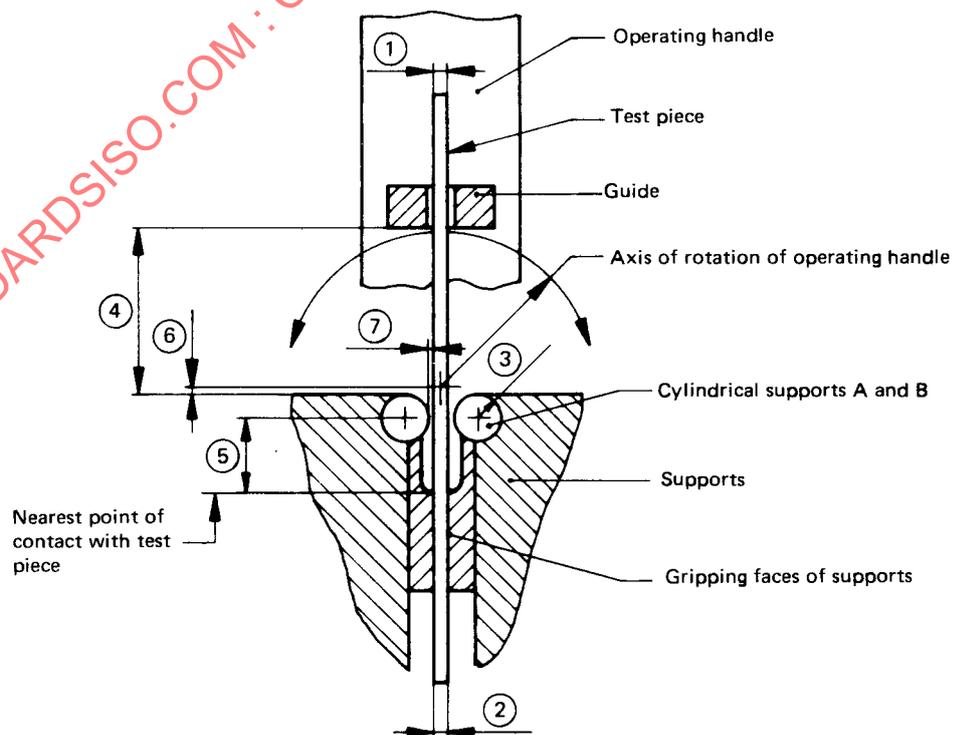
Reverse bend testing of copper and copper alloy wire
